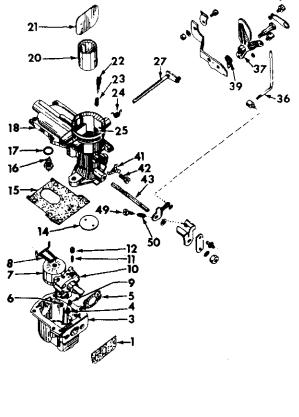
Exploded view of the Zenith downdraft carburetor used on early Ser-ies B-414 and 354 nondiesel tractors.
